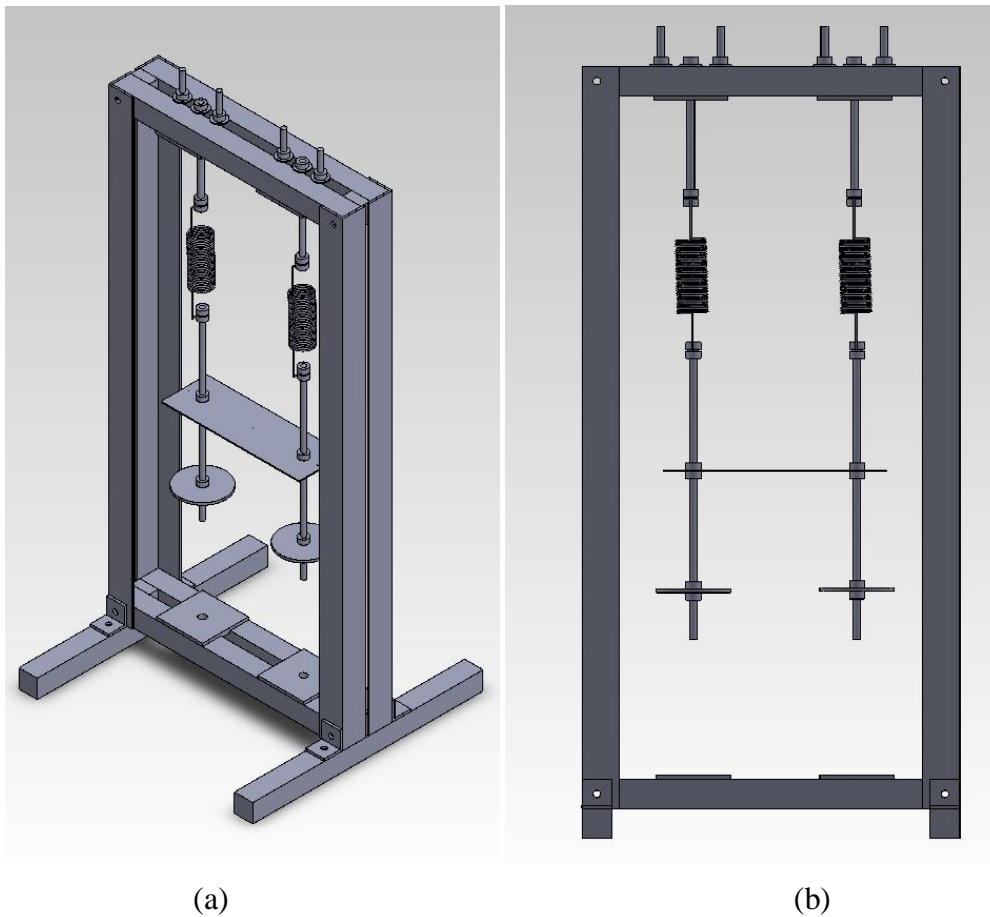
Design Concept 4 (a) isometric view, (b) front view
